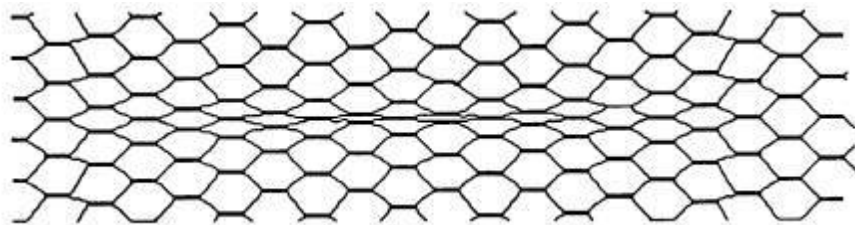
(g) *No filleting due to excessive adhesive out-time.
